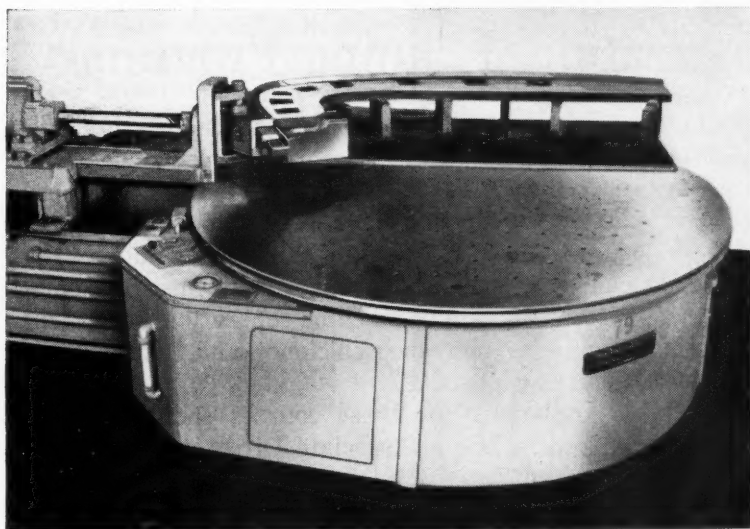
View of the contour former in Fig. 1 after the curved die member has been completely wrapped around the mounting block, the operation having been performed by a rotary movement of the machine table
